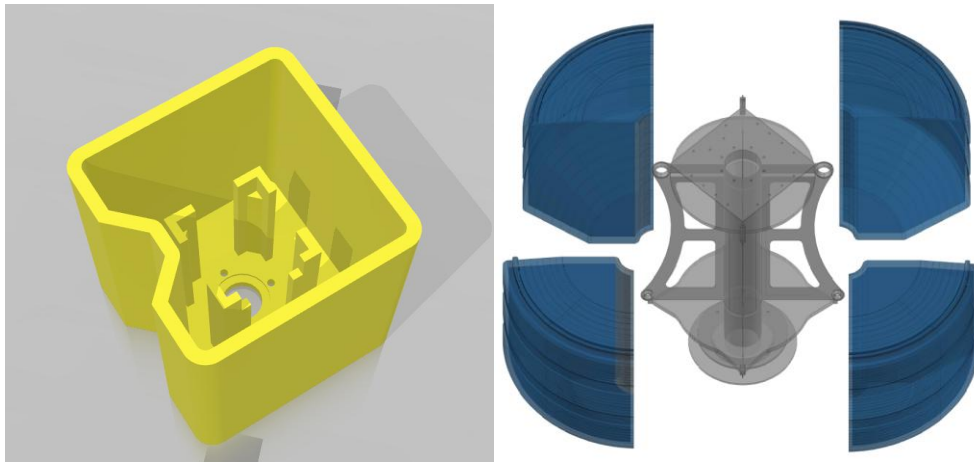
Image of buoy daymark and buoy assembly drawn in Autocad
